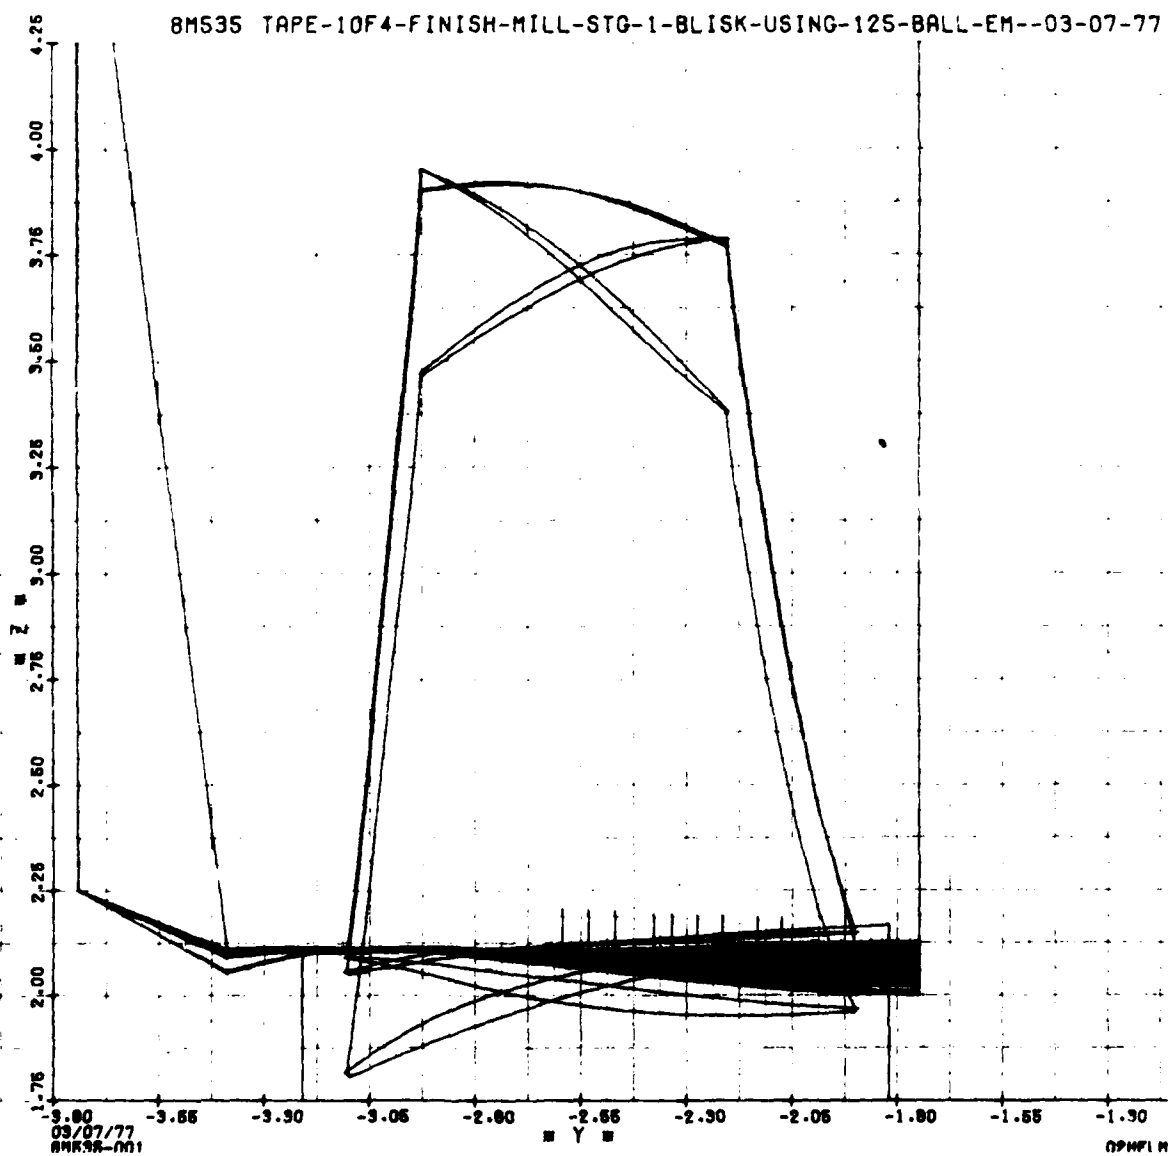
Computer Plots of Tool Paths to Finish Machine Platform.
